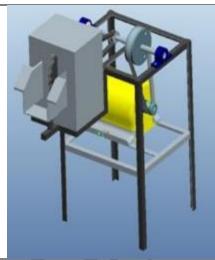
Coconut deshelling machine (Belt and pulley drive)
